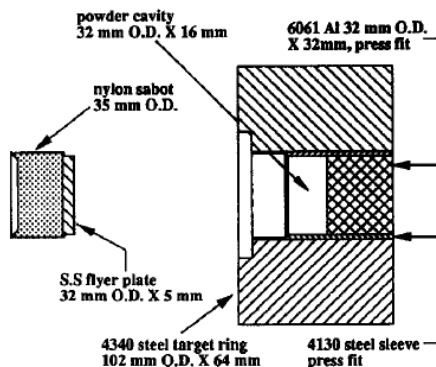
Target fixture and flyer plate assembly used in the shock consolidation. Note that only the sample, and not the containment assembly, is impacted.
